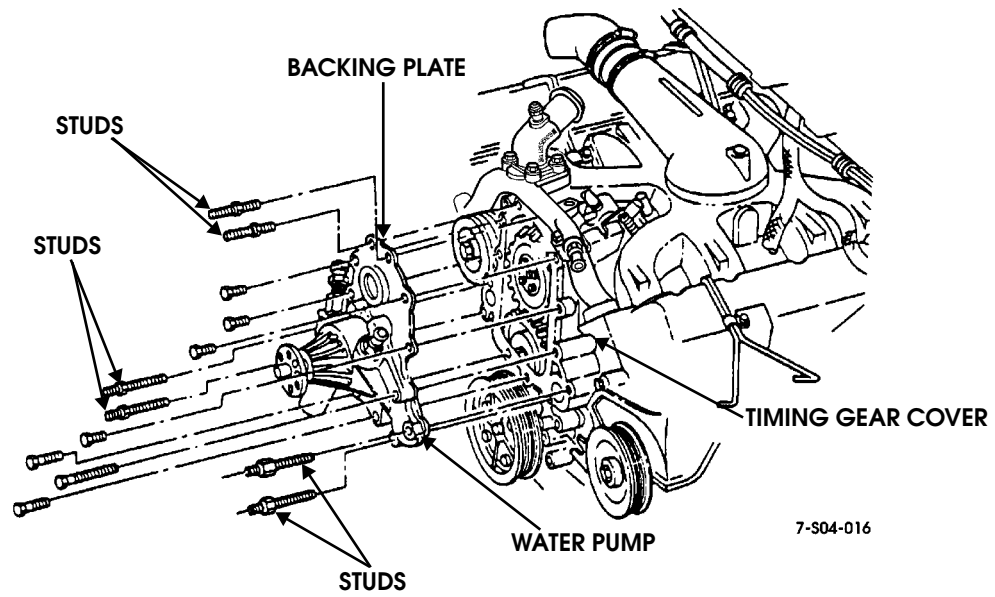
Water Pump and Adapter Plate Removal/Installation
